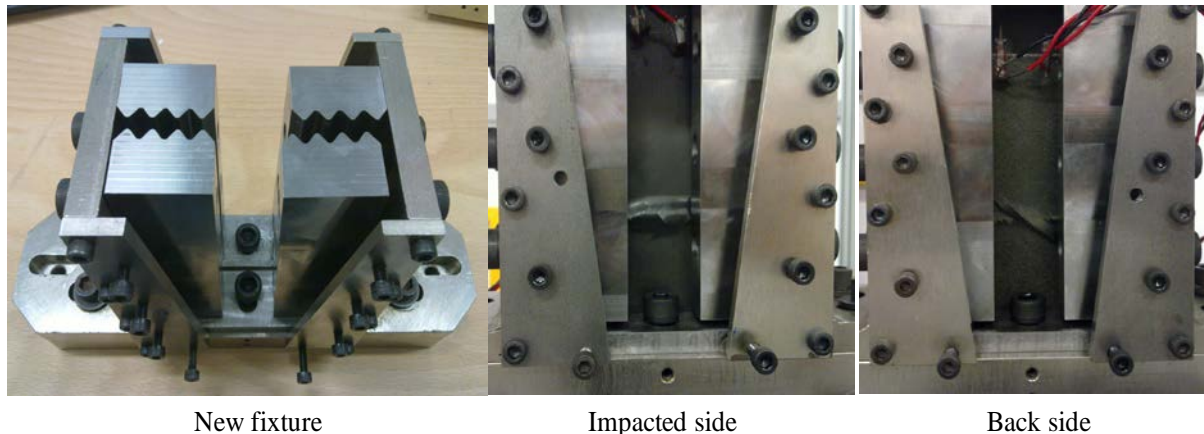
The modified CAI fixture for thin specimens and an example of tested thin specimen
